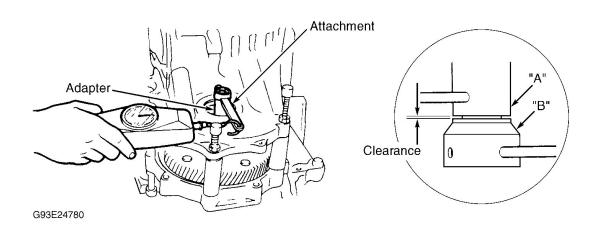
Measuring Differential Side Bearing Preload Courtesy of MAZDA MOTORS CORP.
